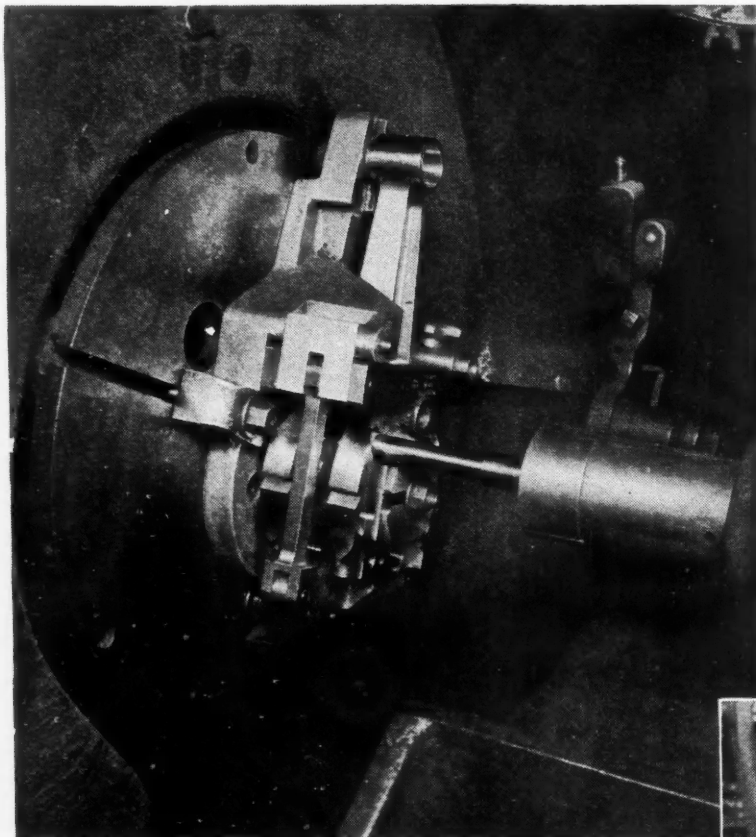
Bryant hole grinder set-up for finish-grinding articulated rod-pin holes in a double-row master rod. To prevent distortion of the rod, the entire fixture that holds the cap on the rod floats on four pins. Holes are spotted in the fixture to correspond with holes to be ground in the master rod. The fixture is made of aluminum alloy to minimize effect of centrifugal forces.
